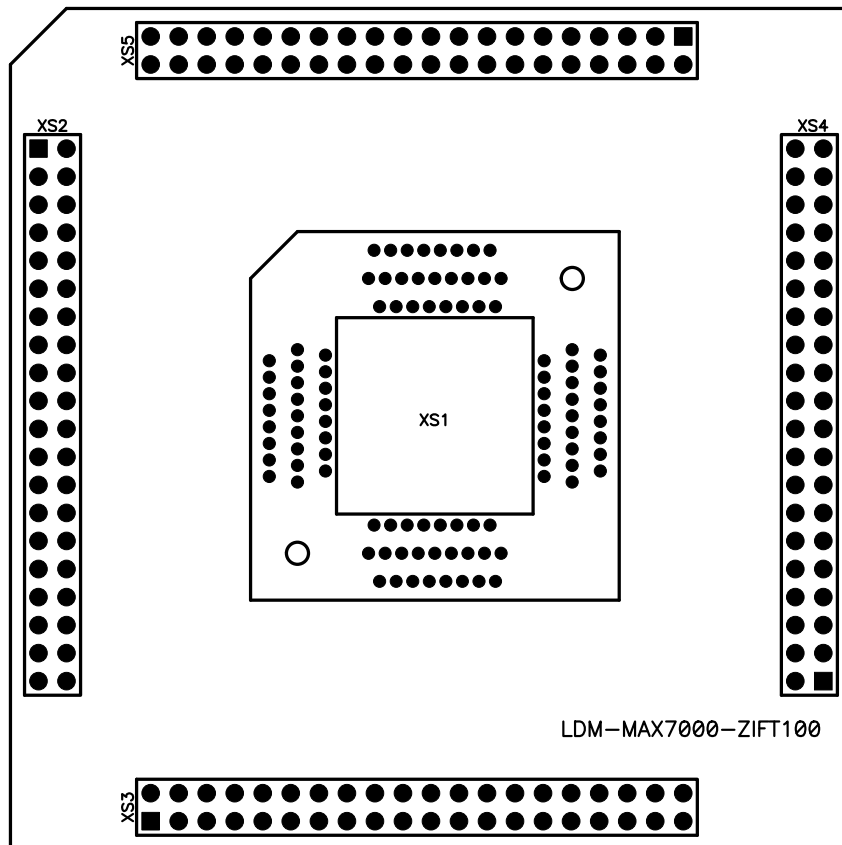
Location of elements on the development board of the expansion module LDM-MAX7000-ZIFT100
